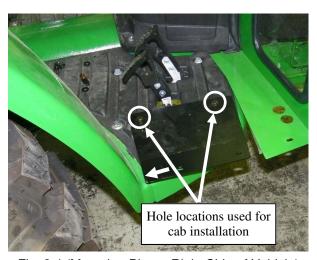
(Mounting Plate - Right Side of Vehicle)
